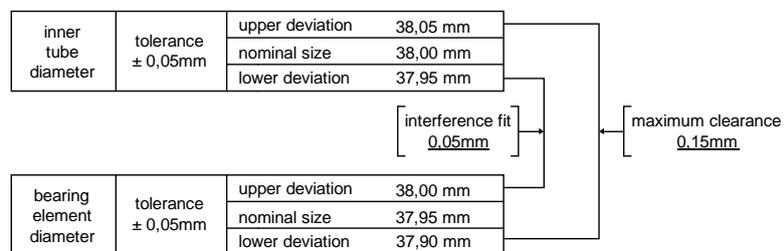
Selection of the tolerance field for the tube and the bearing
